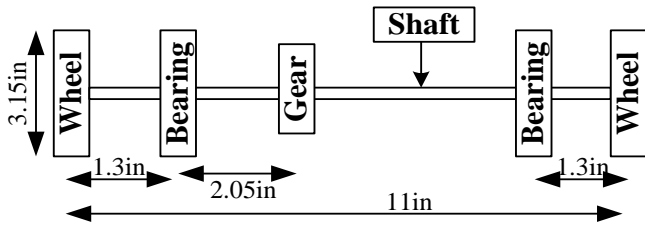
Location of wheels, bearing, and gear on the shaft.
